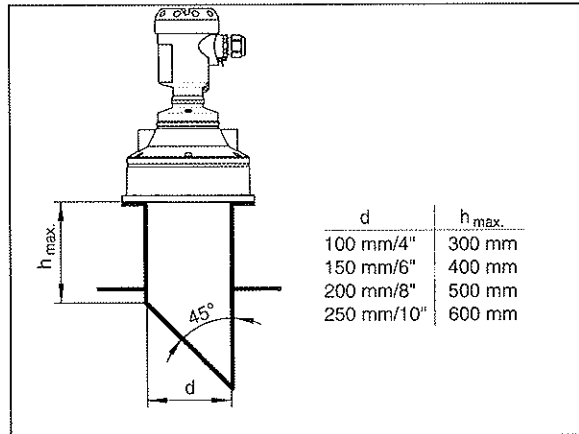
Deviating socket dimensions with OPTISOUND 3030 C
